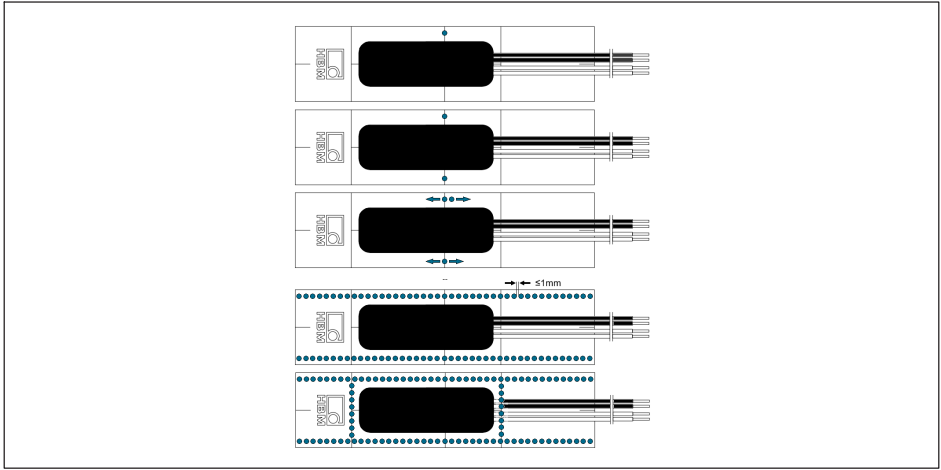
Welding sequence for the LS31 HT
